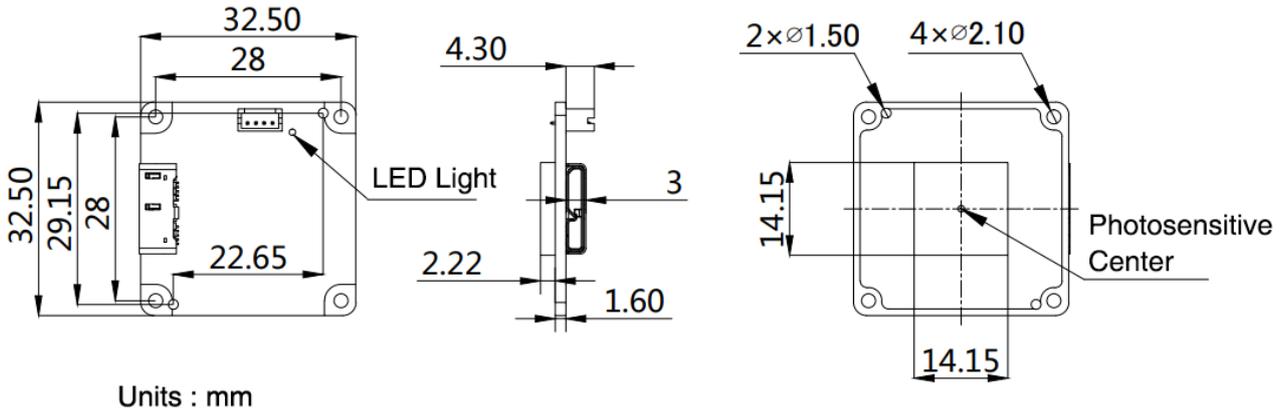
VEN-161-61U3M/C-M06 mechanical dimensions
